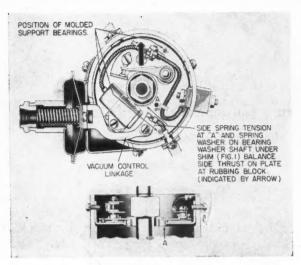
Top and side cutaway view of the distributor and vacuum advance mechanism. Notice the oil hole, indicated at "A".
